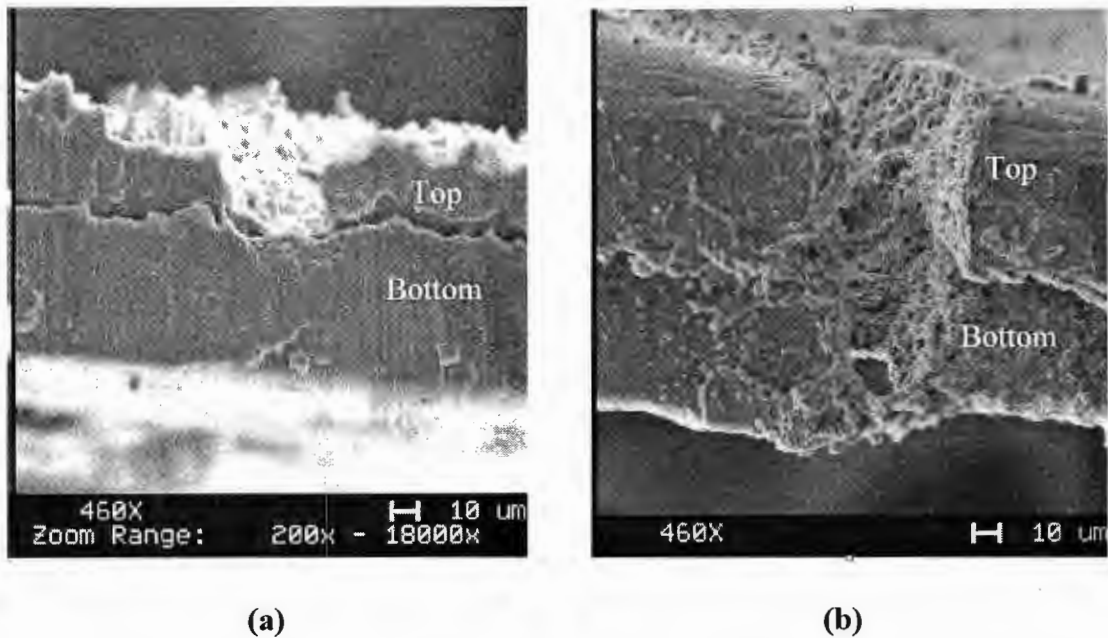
Transverse section of Nd:YAG welds produced by micro-welding with 3.6 W average laser power, 0.9 m/min welding speed, and 1.8 mJ pulse energy: (a) single-beam welding resulted an incomplete penetration, (b) dual-beam laser welding produced much better penetration.
